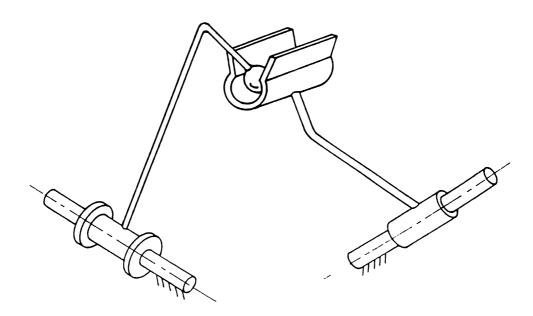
The revolute - sphere-groove - cylinder (R-Sg-C) mechanism
